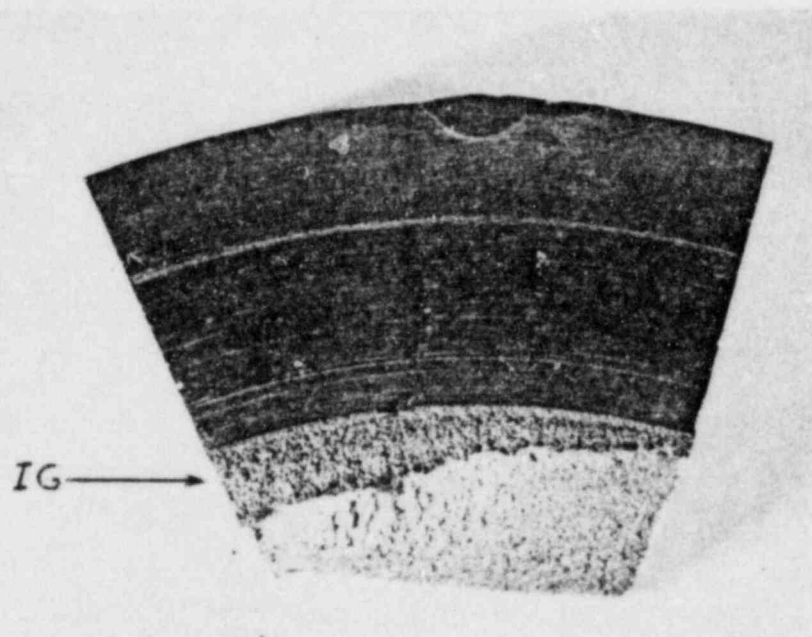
MACRO OF IG CRACK IN LOWER PORTION OF VALVE STEM, 3.4X
